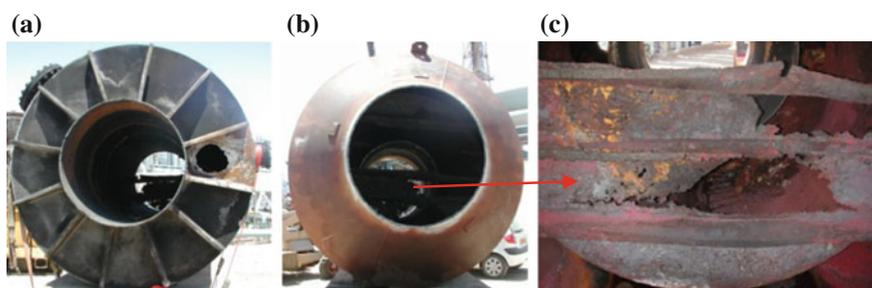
a Corroded lower part of the ‘molecular seal’ (the location of corroded cracked drain pipe). b Upper part of the ‘molecular seal’ (corroded parts inside). c Corroded parts inside the ‘molecular seal’
